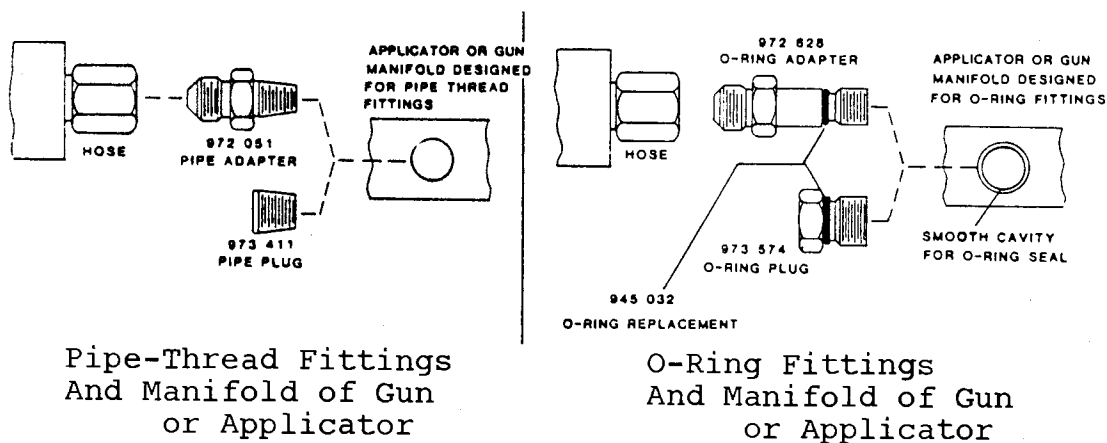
Diagram of O-Ring and Pipe-Thread Fittings for H20 Noncirculating Guns, H200 Automatic Guns, and Series 2000 Applicators
